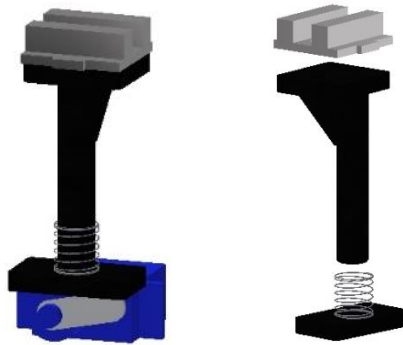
CAD of an Assembled Universal Locking Mechanism
